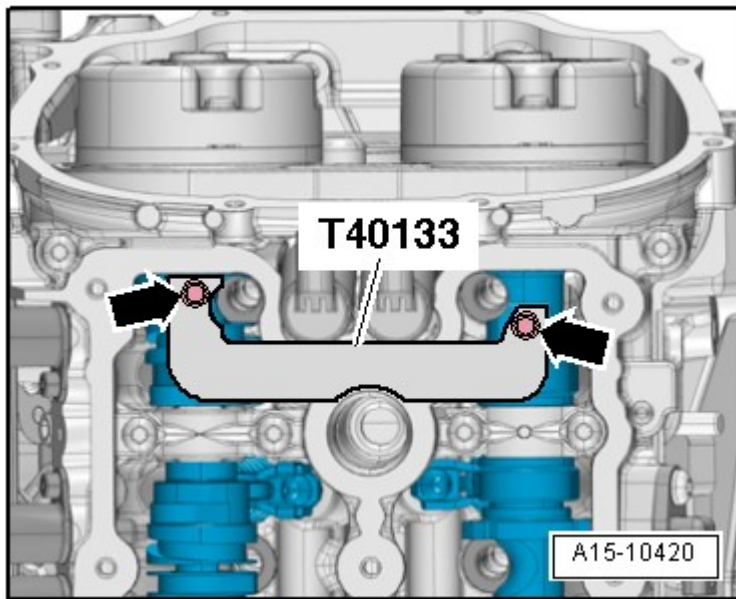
Before Installing Cylinder Head, Set Crankshaft And Camshafts To "TDC"
